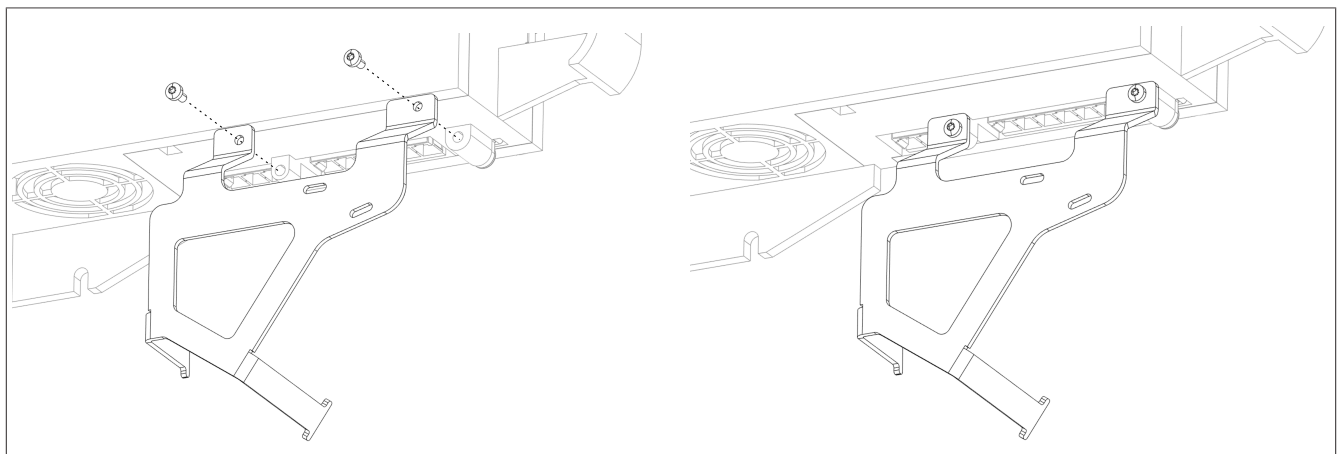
Shield component set 8SCSE01.0100-00 - Installation
